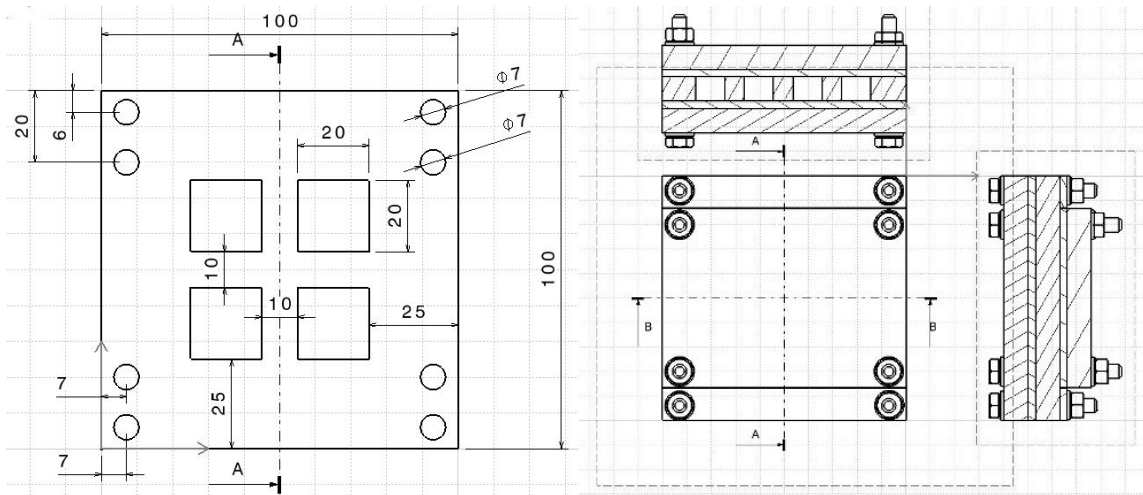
PTFE mold (left; here for rectangular samples), pressed between aluminum sheets (right; fixed with screws); dimensions in mm.
